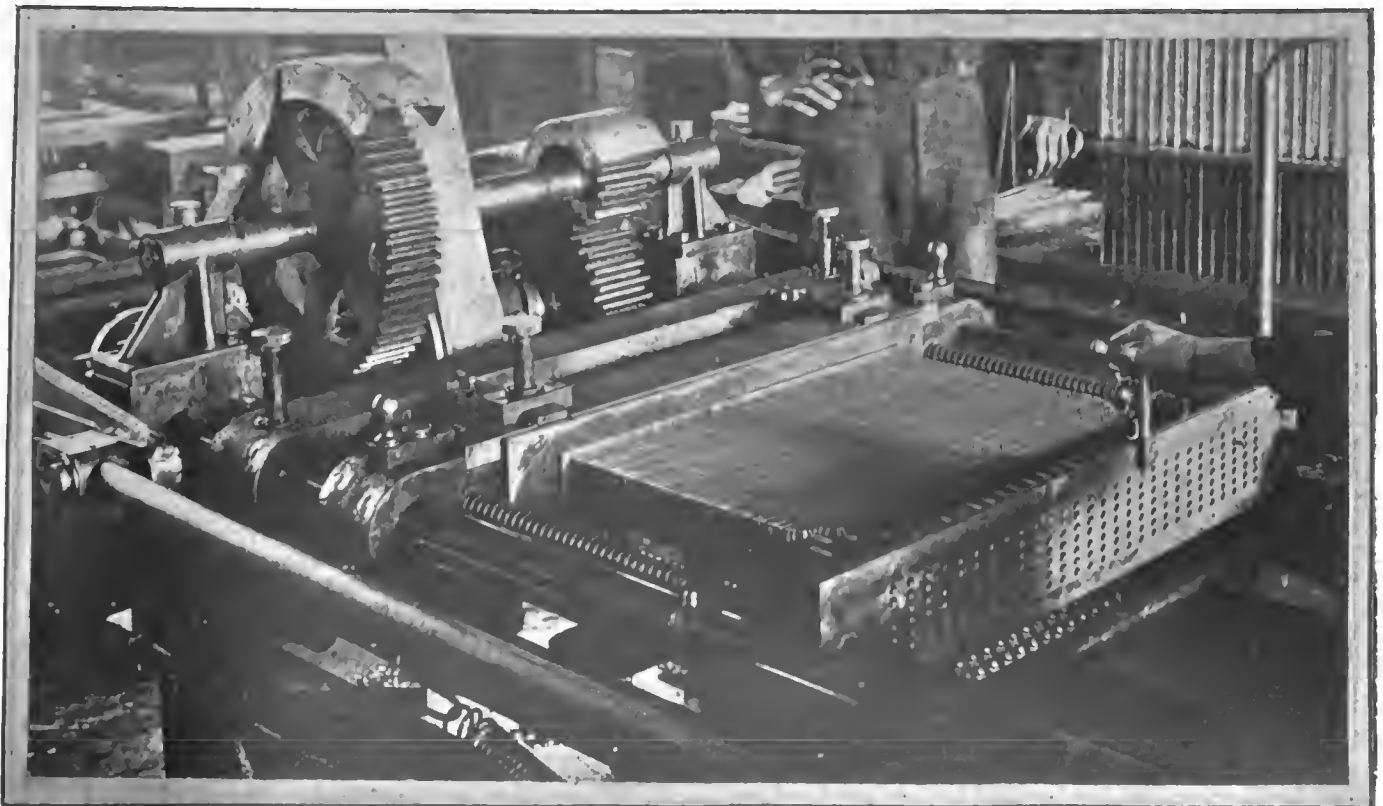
Process and press, used to assemble McCord radiators, showing gill-plates being pressed on
